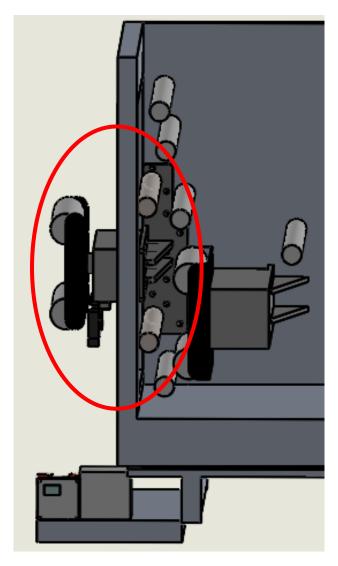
Device Mounted to Lidding Printer Back Panel Alternative
